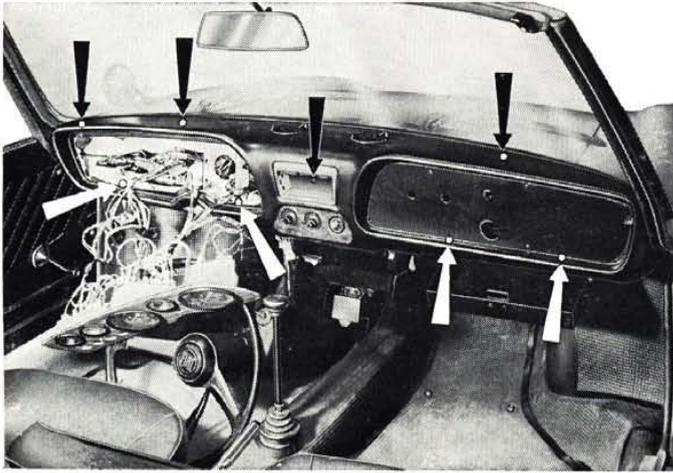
Layout of instrument panel lining holding points. Arrows evidence location of lining holding screws, nuts and lugs.
